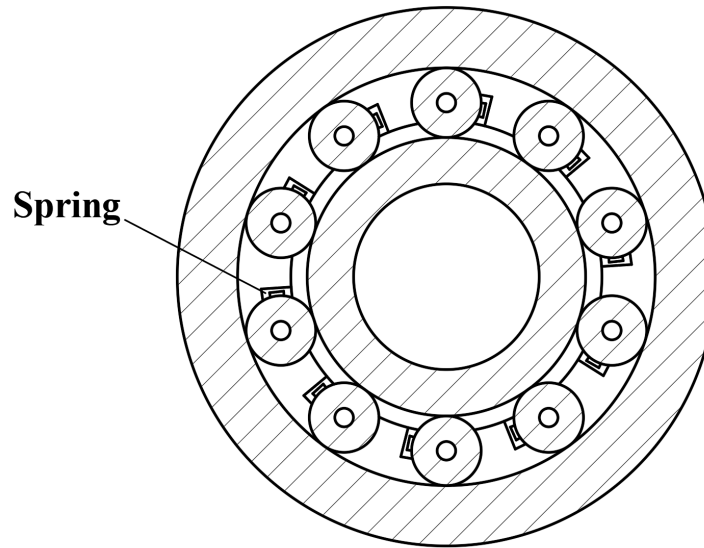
Plate spring besides-star wheel retainer-free roller clutch CN214534151U.
